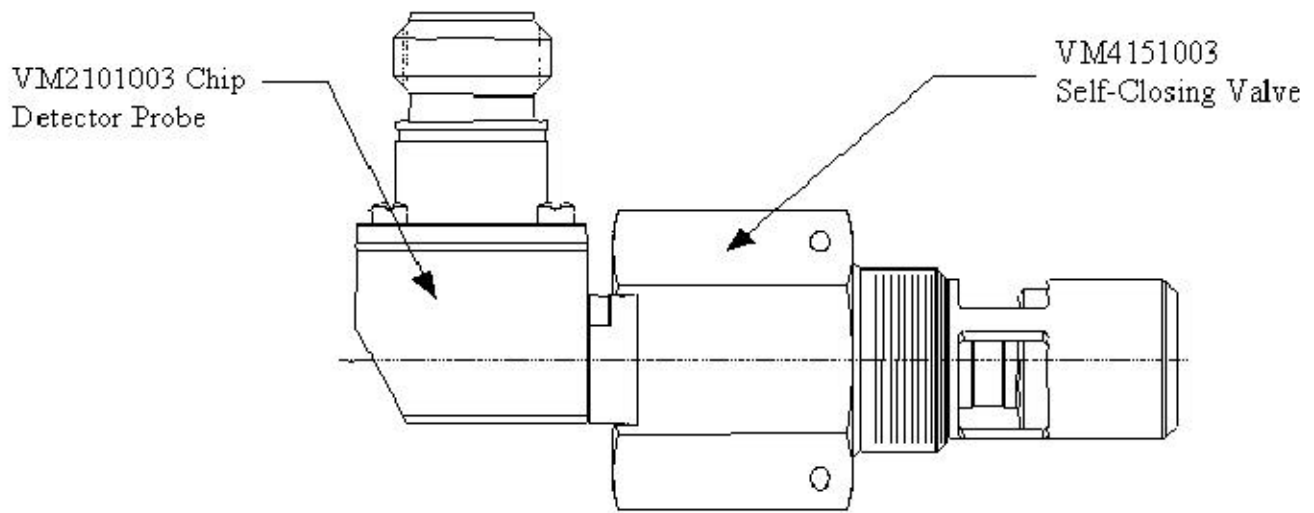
VM2451001 Chip Detector with Self-Closing Valve Assembly
